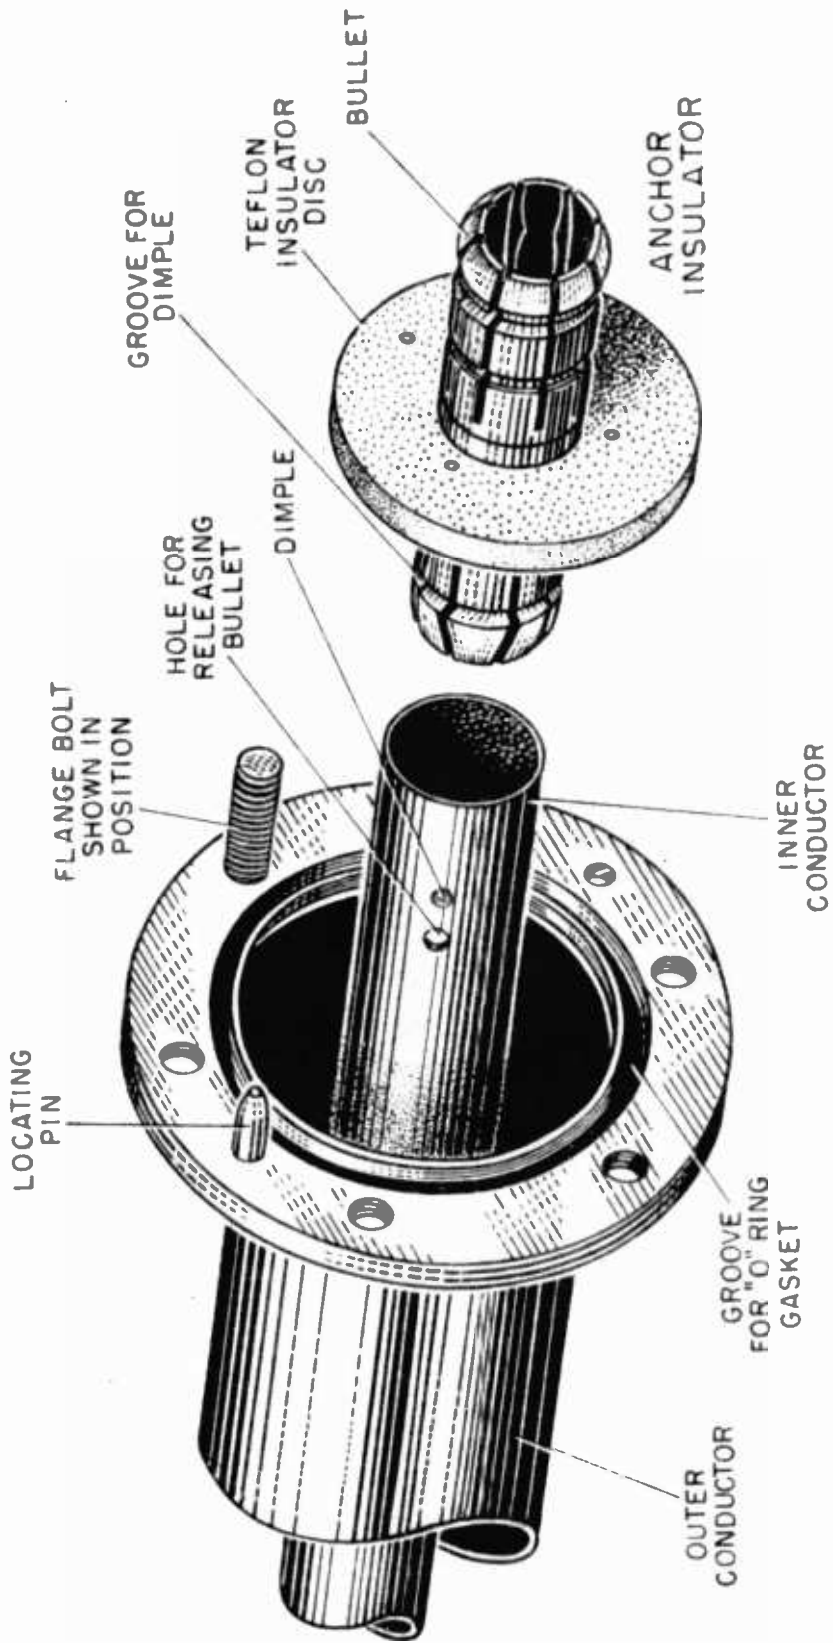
TRANSMISSION LINE MI-19089. UPPER FLANGE ASSEMBLY
